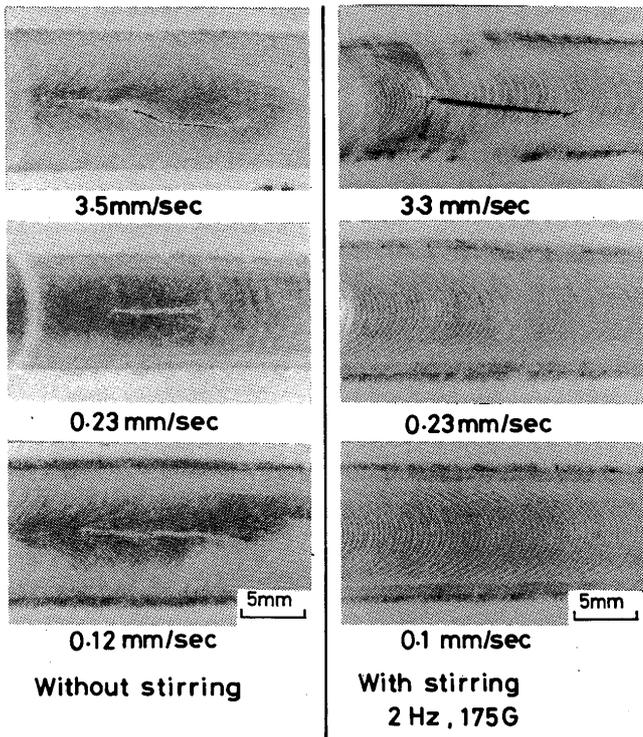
General appearance of weld bead showing cracking caused by the Vatra tensile hot cracking test with various tensile speed under a constant displacement of 0.7 mm for 0.24%Zr containing Al-2%Zn-3%Mg alloy with and without electromagnetic stirring: 55A, 21 V, 150 mm/min; 2 Hz, 175 gauss
